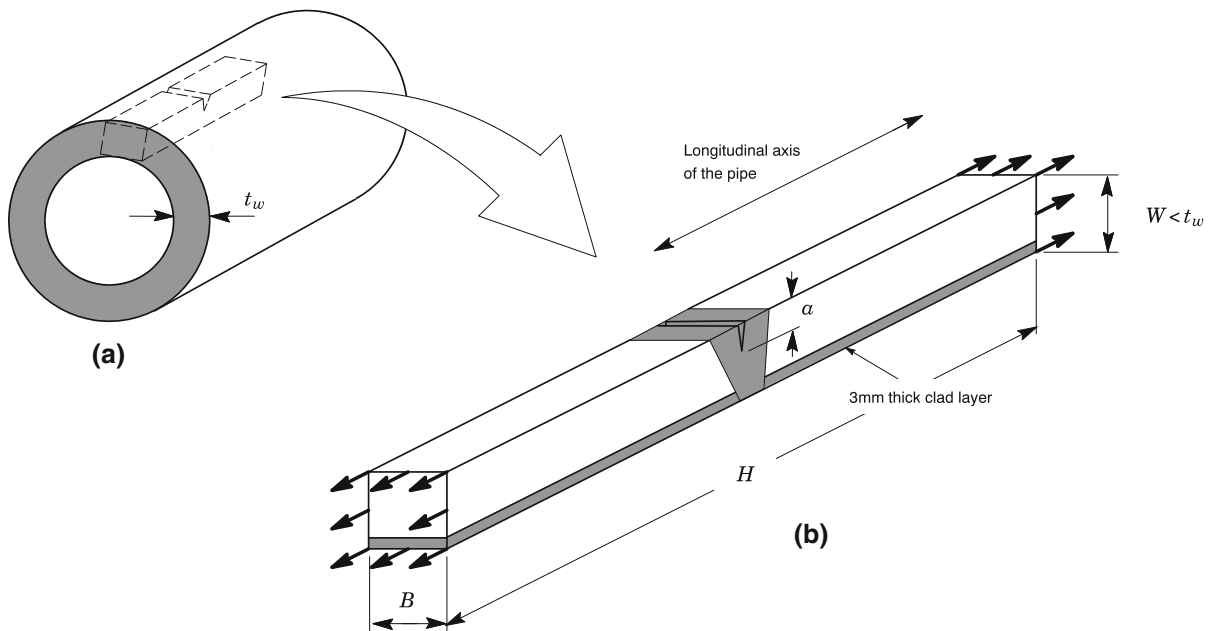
Geometry of tested weld centerline notched SE(T) specimens with fixed-grip loading extracted from the girth weld of the pipe specimen in the longitudinal direction
